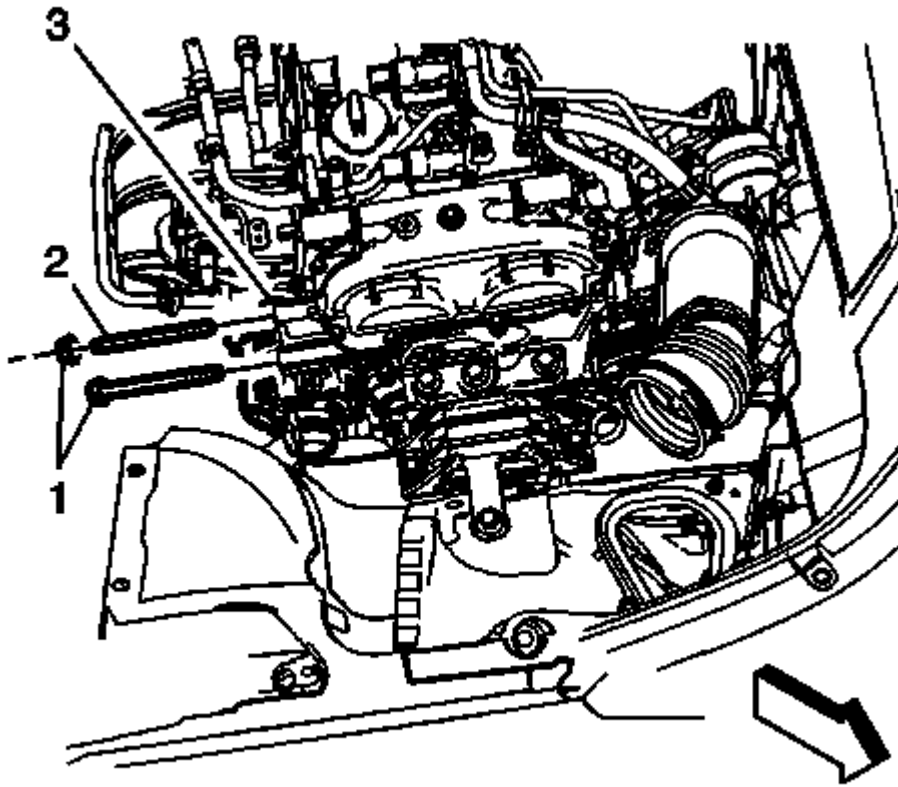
Generator Mounting Fasteners, Generator Mounting Stud And Generator
